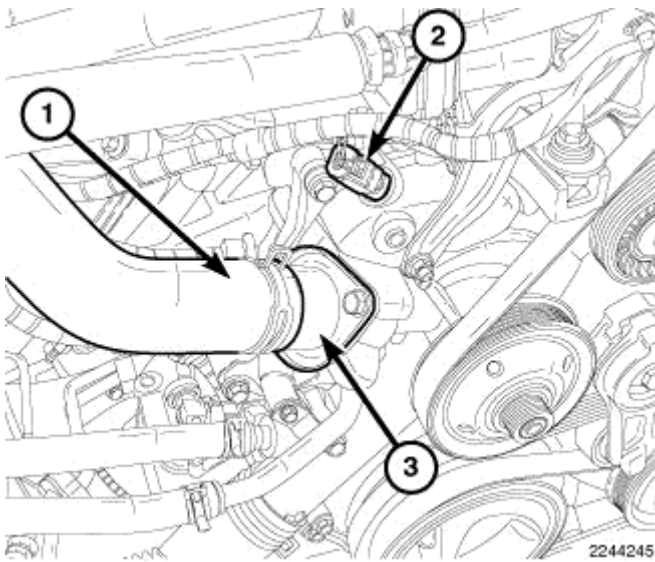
Identifying Engine Coolant Temperature Sensor & MAP Sensor (4.7L)
